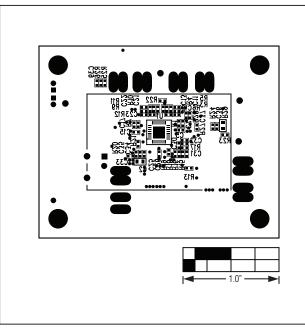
MAX15049 EV Kit Component Placement Guide— Solder Side
